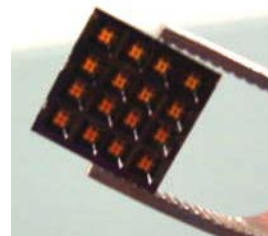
Singulated die with fragile device components, removed from dicing tape before protection layers removal.
